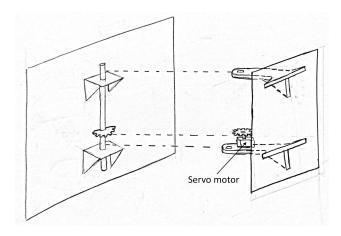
Second design with tablet mount (left), servo mount (right), and servo motor (labeled)
